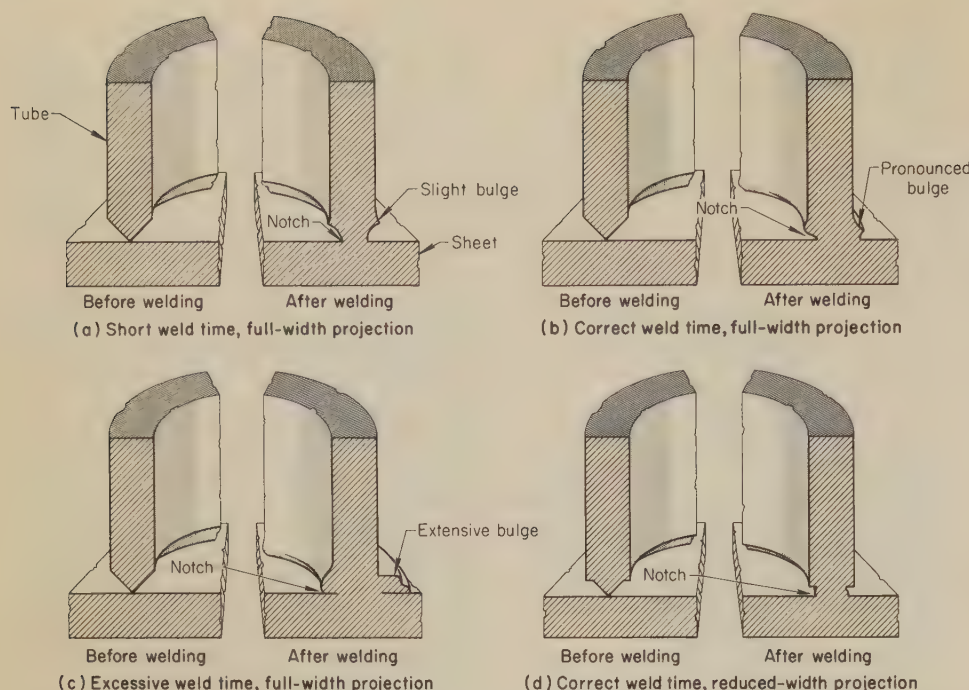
Effects of weld time and width of annular projection on appearance of tube-to-sheet welds (J. J. Riley and J. F. Harris, "Annular Projection Welding of Tubular Sections to Low-Carbon Steel Sheet", *Welding Journal*, July 1966; reprinted as RWMA Bulletin 35)
